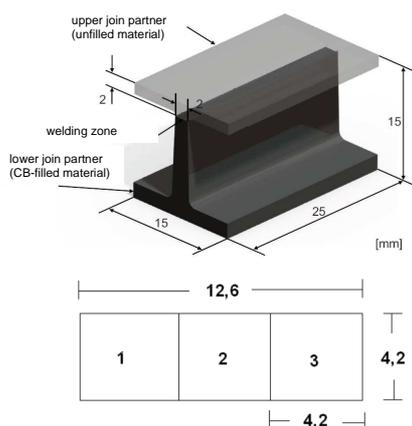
T-Shape and Step Plate sample for laser welding assessment
